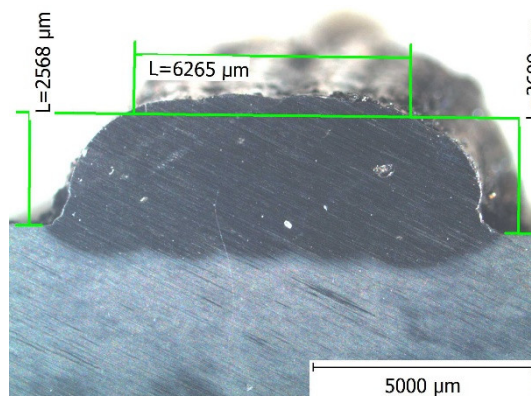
Example of grinding of the surface layer of the H13 welds on the H11 steel.
